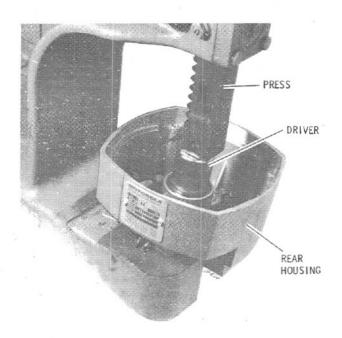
INSTALLING REAR BEARING & SEAL ASSEMBLY
